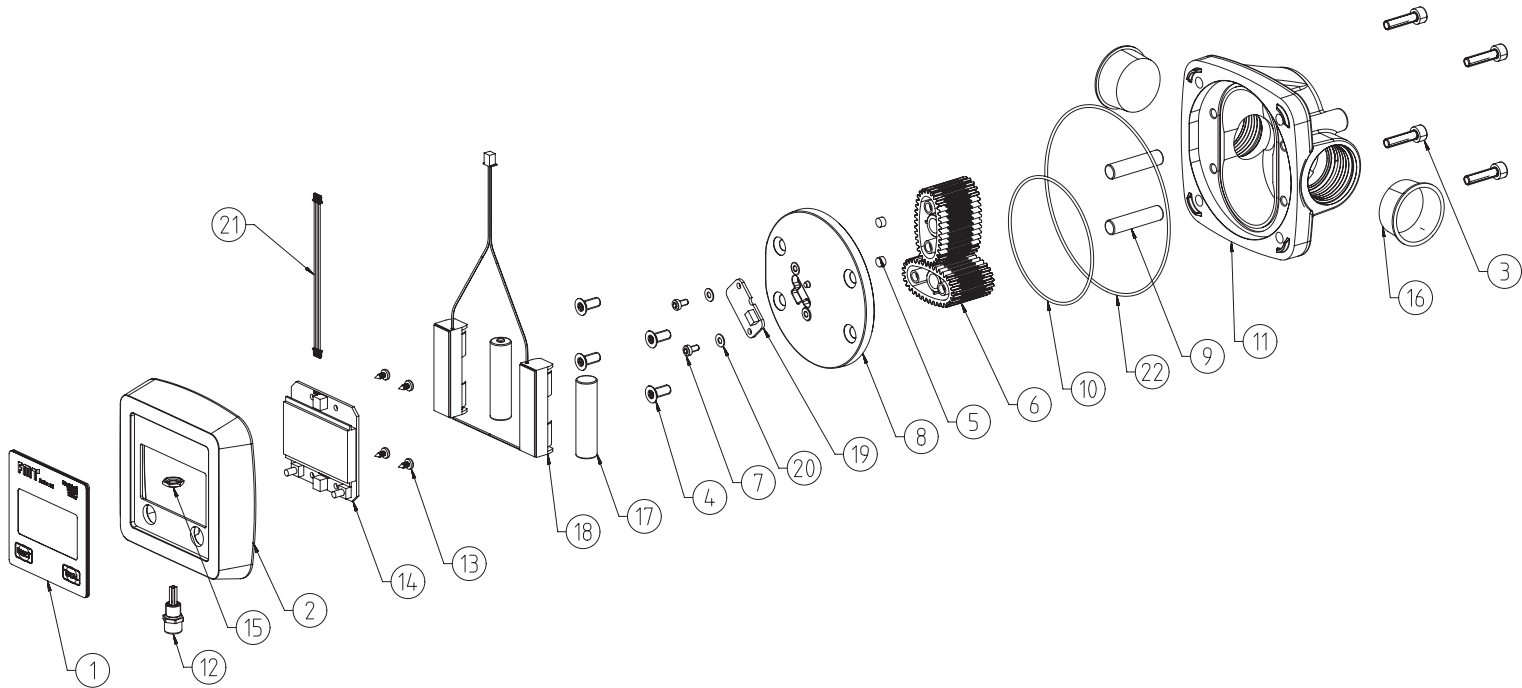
Exploded view and mounting dimensions - digital with display
